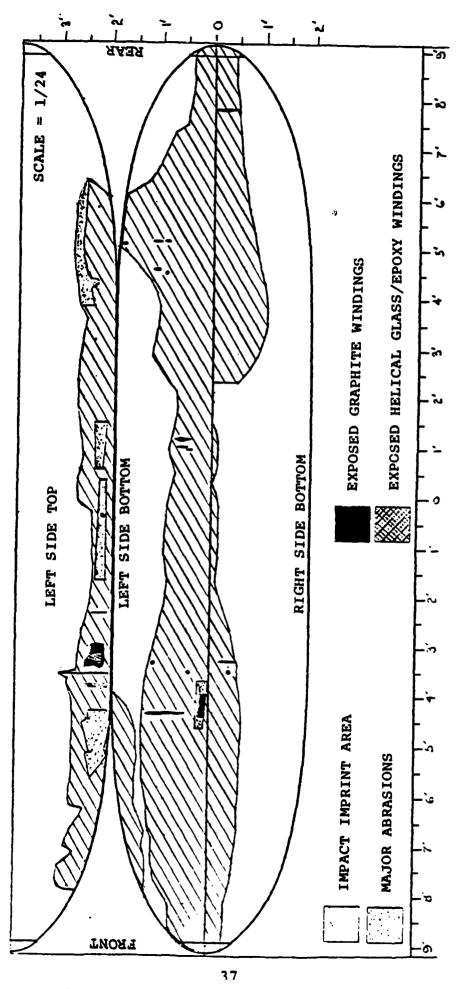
FUEL TANK SN0003 IMPACT IMPRINT SKETCH.
